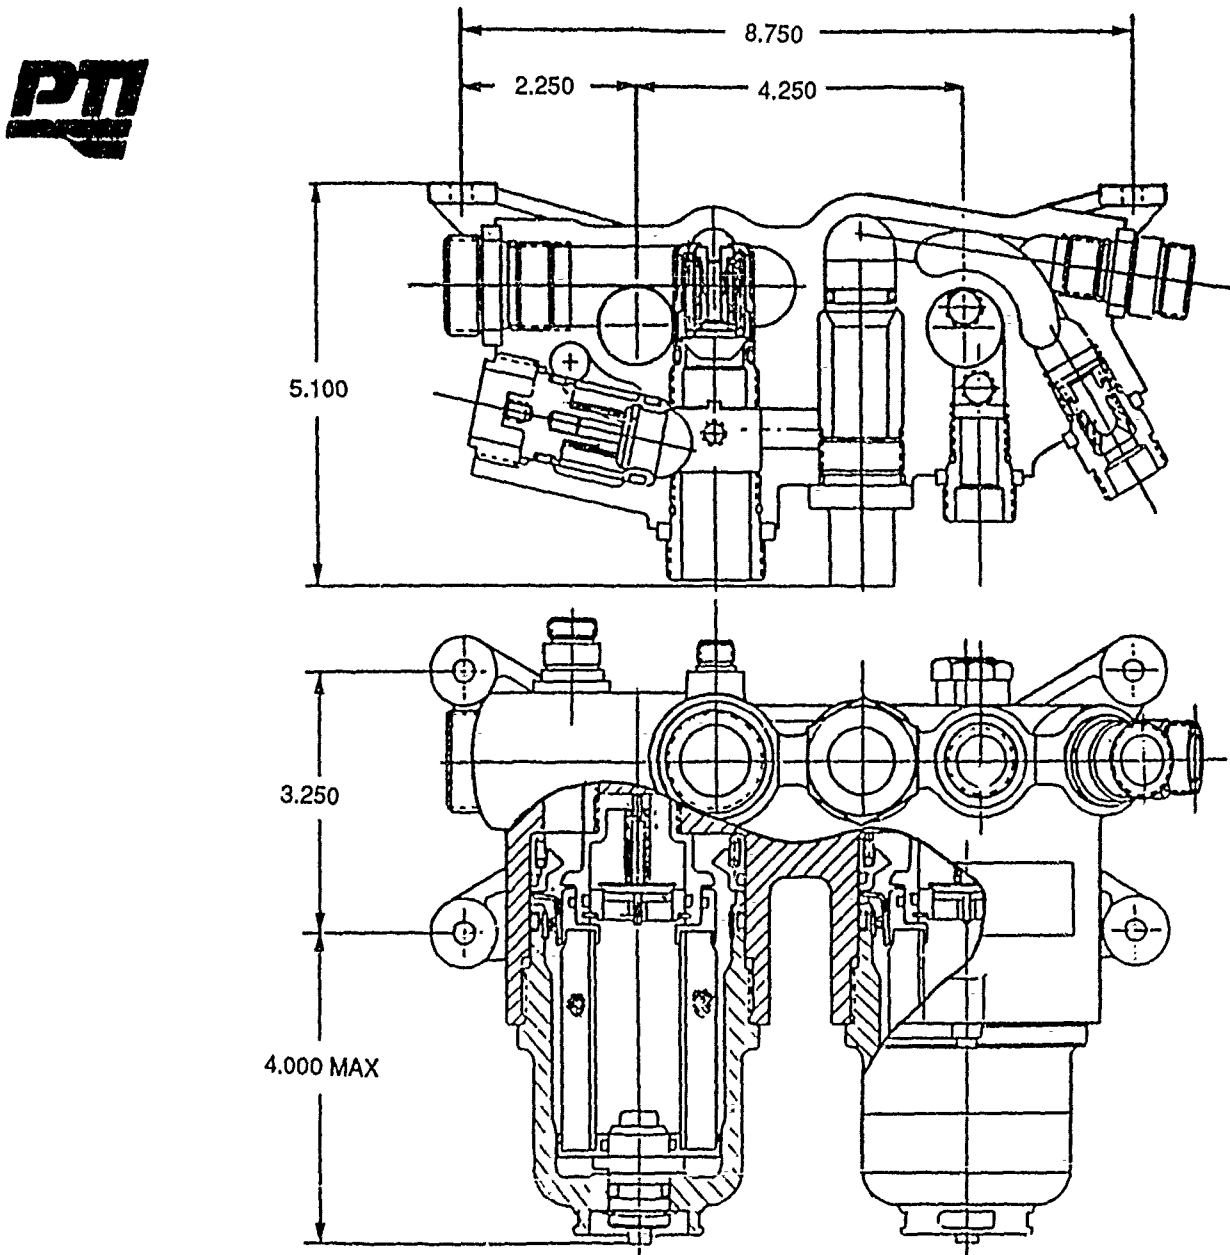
PTI Technologies - Filter Manifold Outline Drawing
